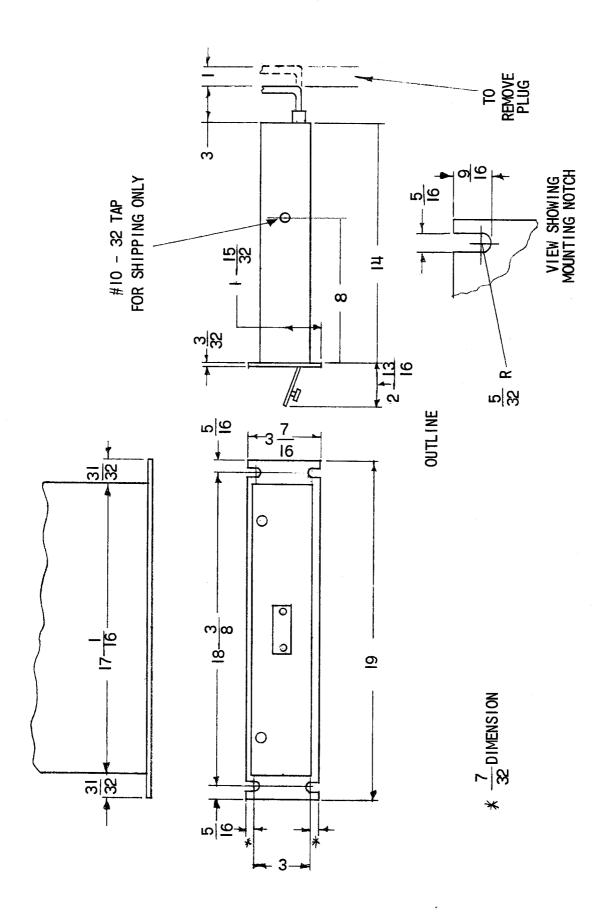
(0227A2036-0) SLYG51C11 OUTLINE AND MOUNTING DIMENSIONS
